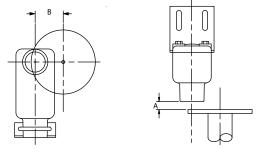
Explosion proof 907 Sensor and Pulser Disc
